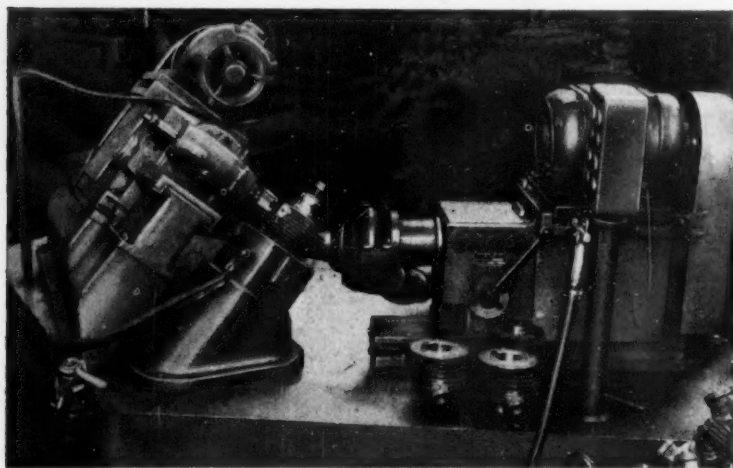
On this Special Oerlikon Italiana Machine, the Exhaust Stub is Turned, Faced and Chamfered by the Head at the Right, and the Intake Port Face is Milled by the Other Head
